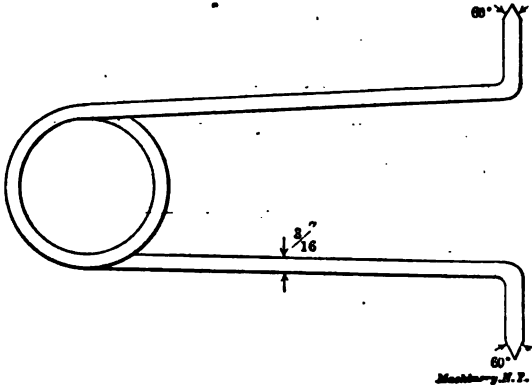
Tool for Cleaning Threads in Chucks and Face-plates
